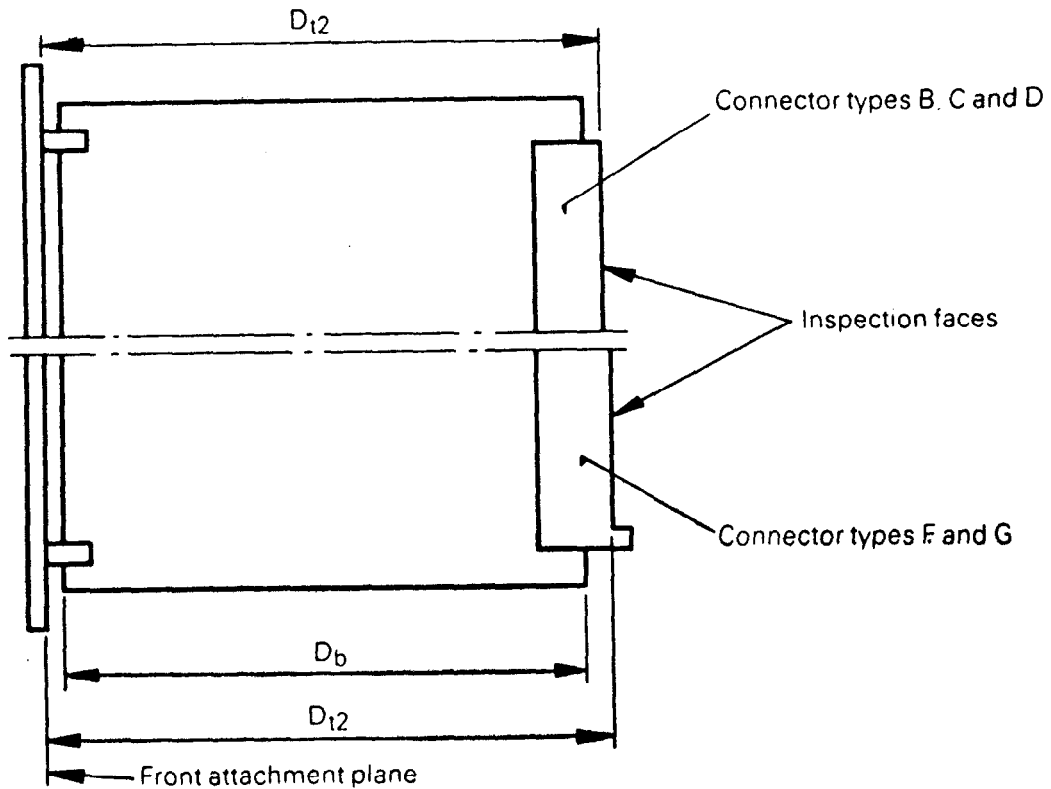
INSPECTION DIMENSIONS D_{t2}
